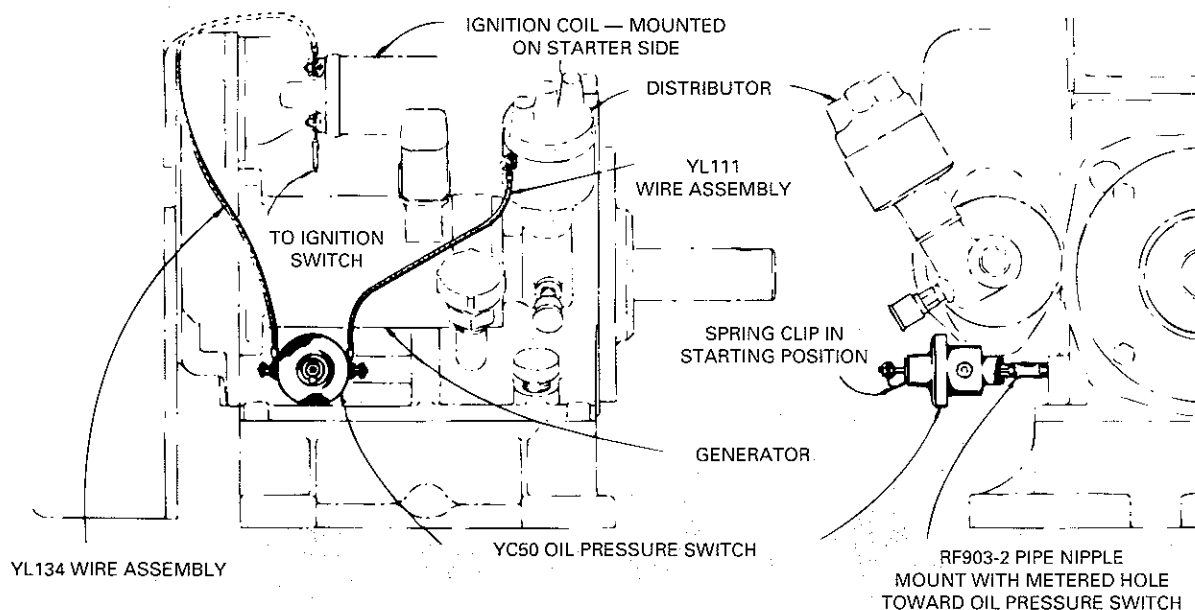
Oil pressure switch mounting, with battery ignition, distributor
